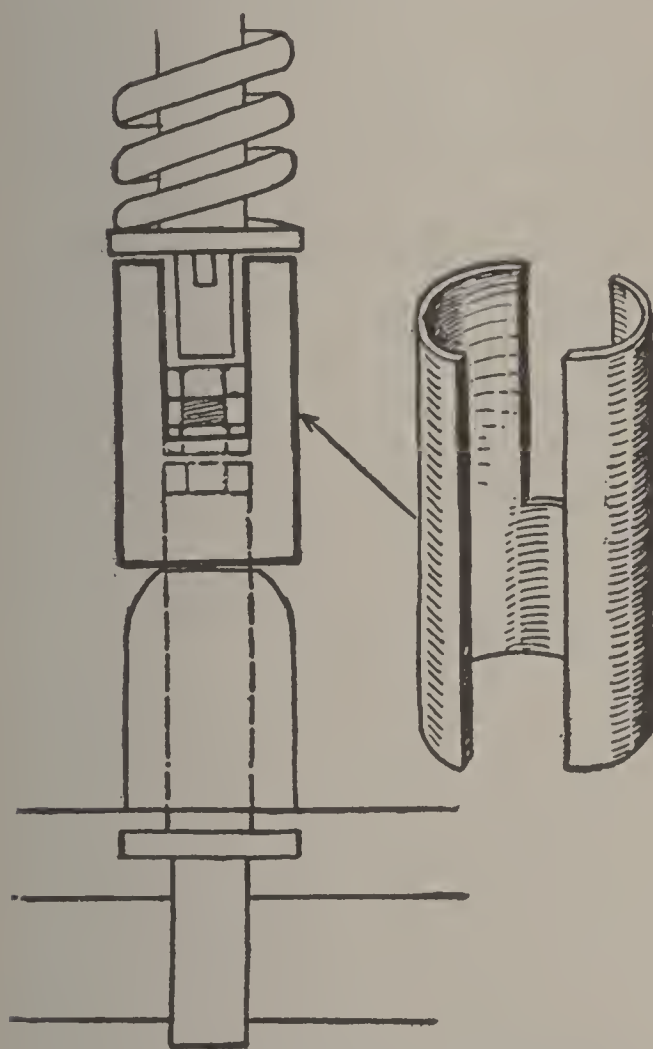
A Substitute for a Valve Spring Remover Which Pushes Spring Away as Motor is Turned
